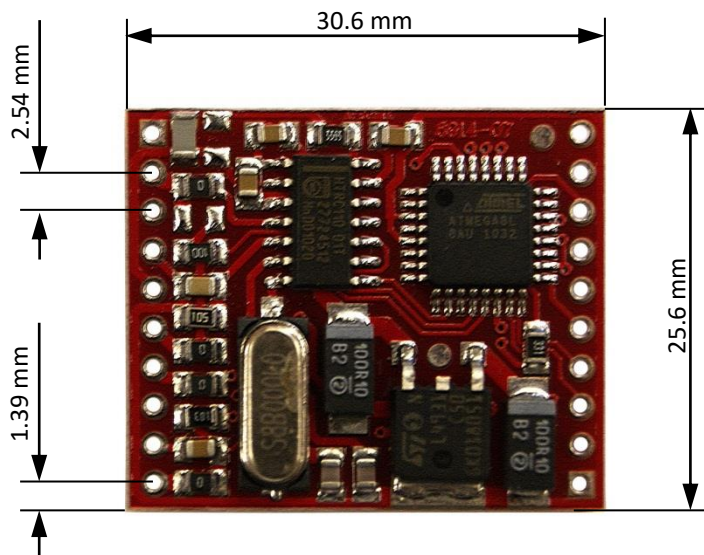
Dimensional Drawing of OEM Module, view onto upper side with RFID reader IC
